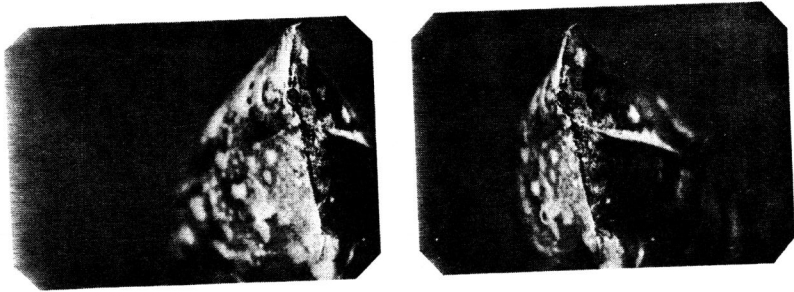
Stereofractograph of specimen fractured at 85 °K.
